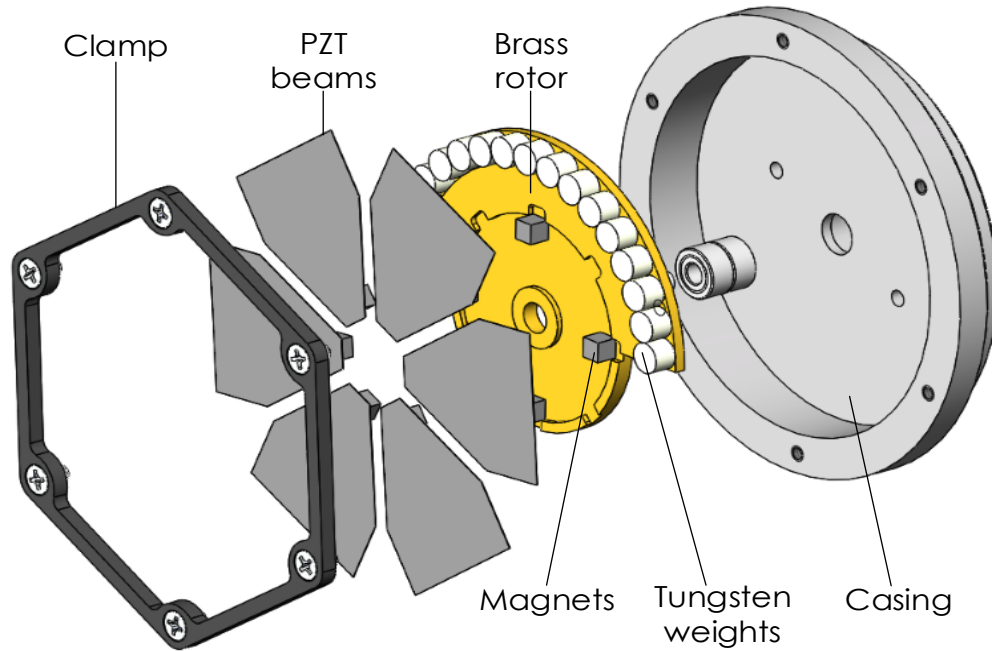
Illustration of PZT beams, rotor, magnets with other parts for flower petal designed device (Gen III). [Drawn by Tiancheng Xue]
